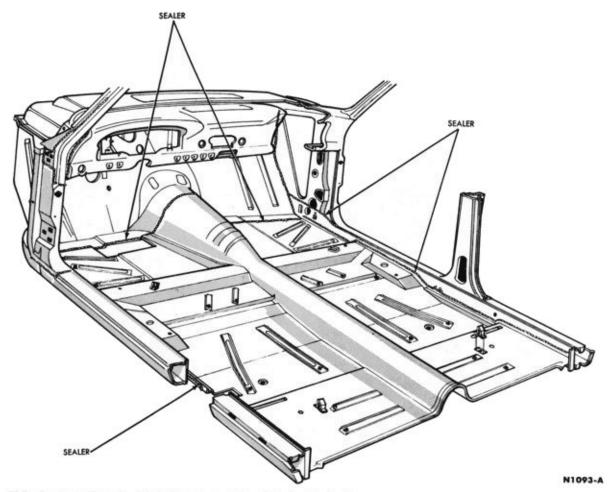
Front Floor Cowl Side & Instrument Panel Sealer Application
